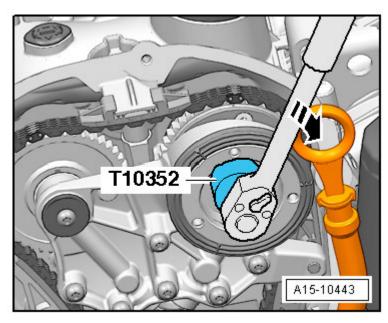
Identifying Assembly Tool T10352 To Remove Control Valve
